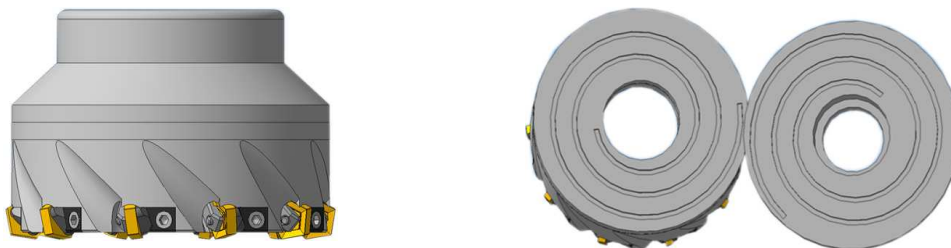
3D model of a face milling cutter of a streamlined shape formed by two mating tori and balancing screws (a)
